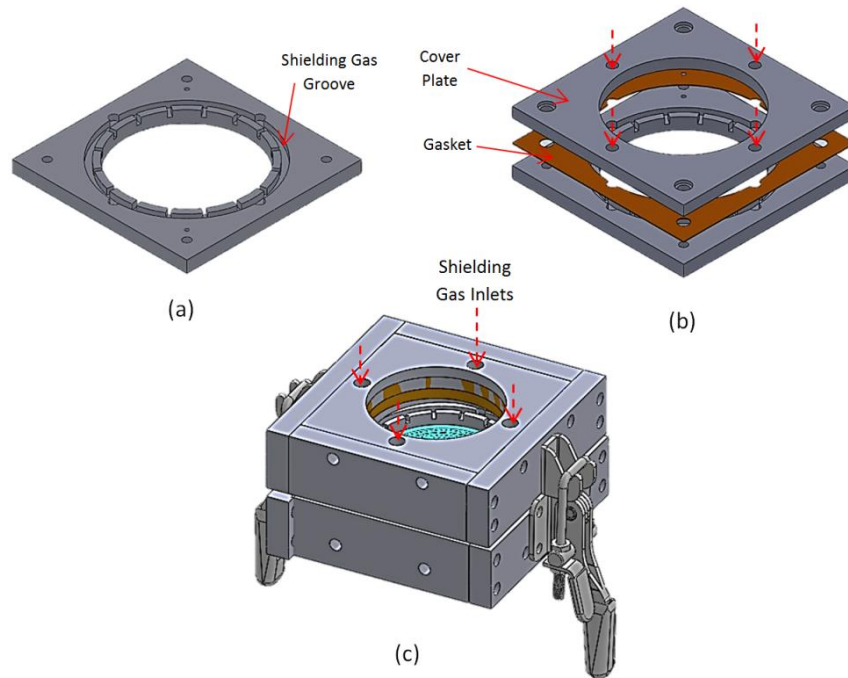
Modified clamp design: (a) modified top platen; (b) modified top platen assembly; and (c) assembled cooling plate clamp showing shielding gas inlets.
